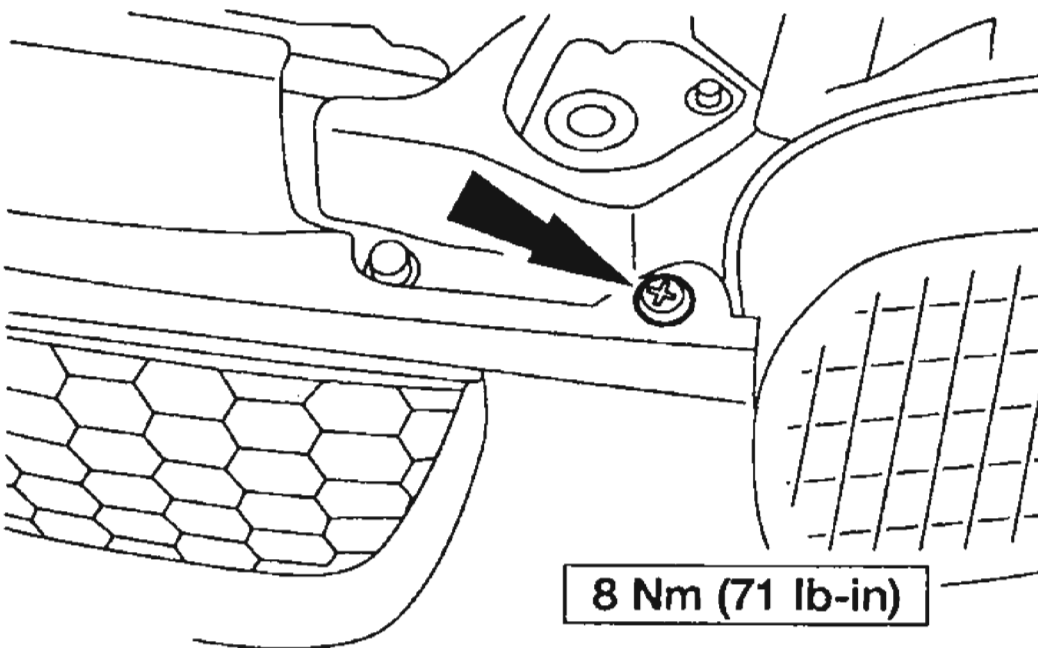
Removing Lower Front Bumper Cover Bolts
